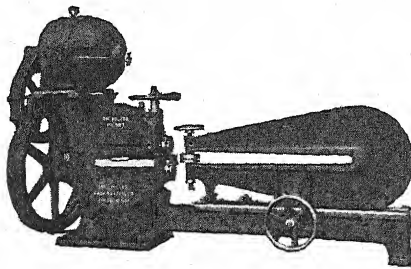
The Single-Geared Squaring and Gap Trimming Shears.
